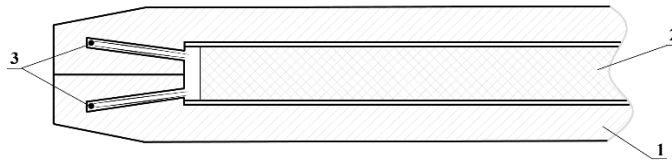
The sensor design: 1 – hot electrode, 2 – heating element, 3 - thermocouples
